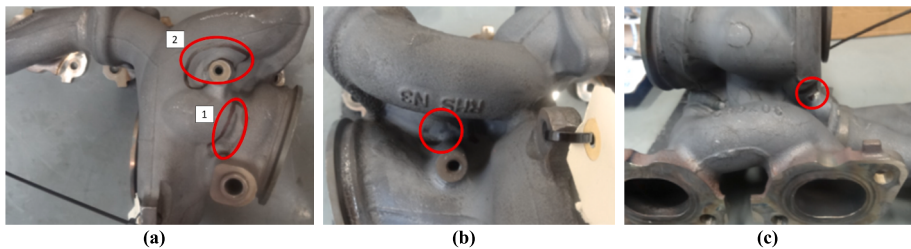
Engine B1 – dye penetrant test results, (a) left-hand side exhaust manifold, (b), (c) right-hand side exhaust manifold.
